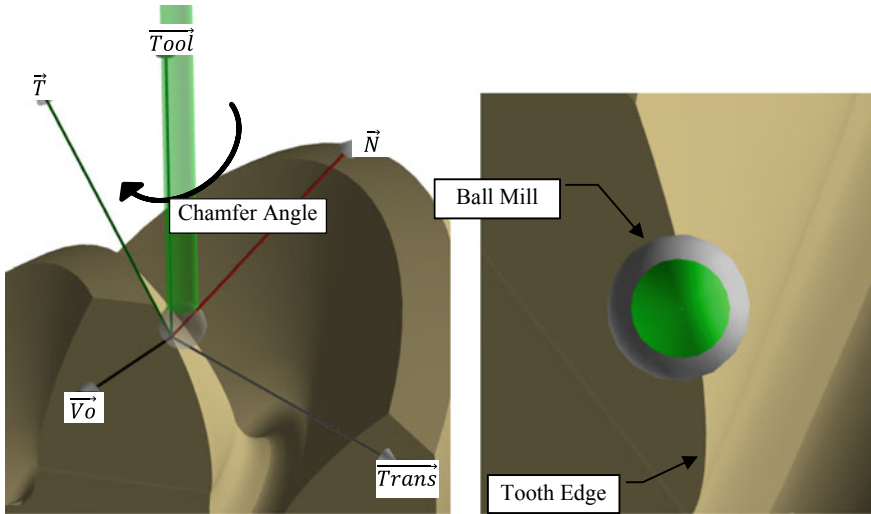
End Mill installation for Toe/Heel chamfering—helical and spiral bevel gears
